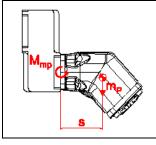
25; Connection cardan shaft drive. Flange according to DIN ISO 7646
